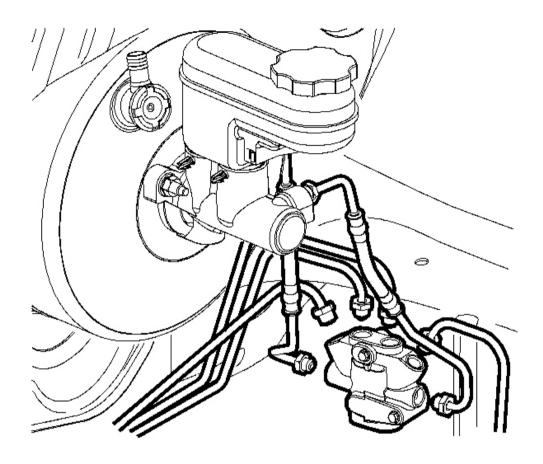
Removing Plugs From Proportioning Valve Assembly Courtesy of GENERAL MOTORS CORP.
